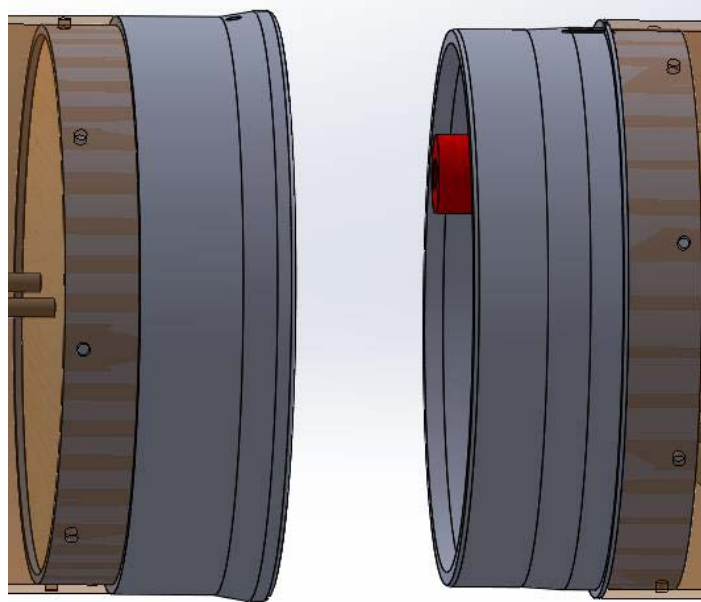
Custom Machined Aluminum Coupler. Source: [2].
